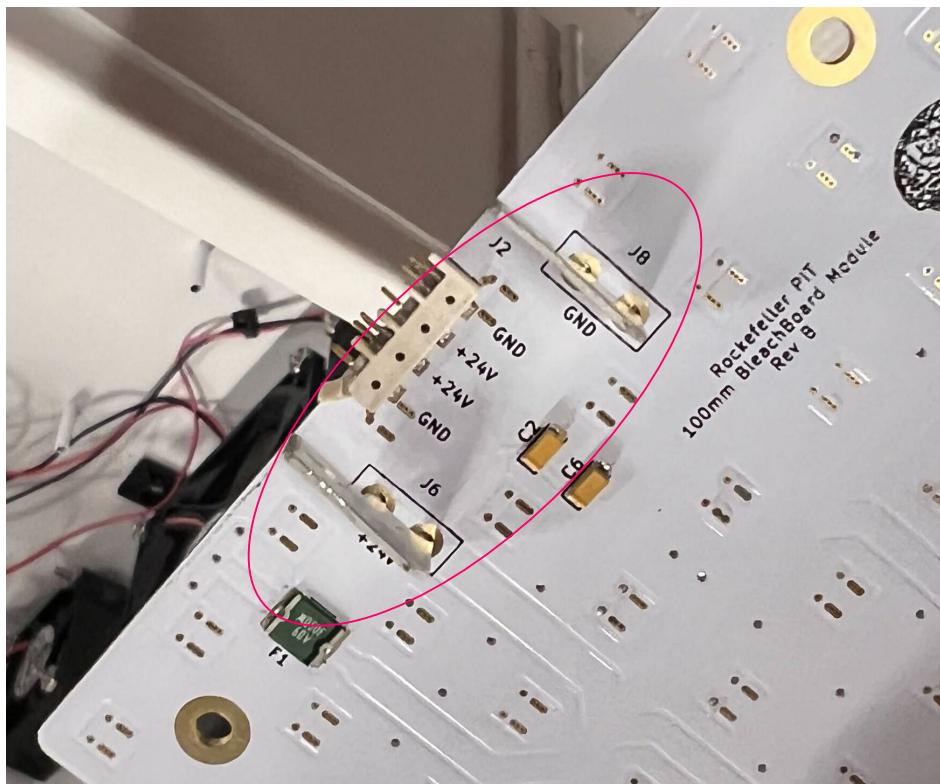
Orientation of the blade connectors. They should be pointed to the edge of the board.
